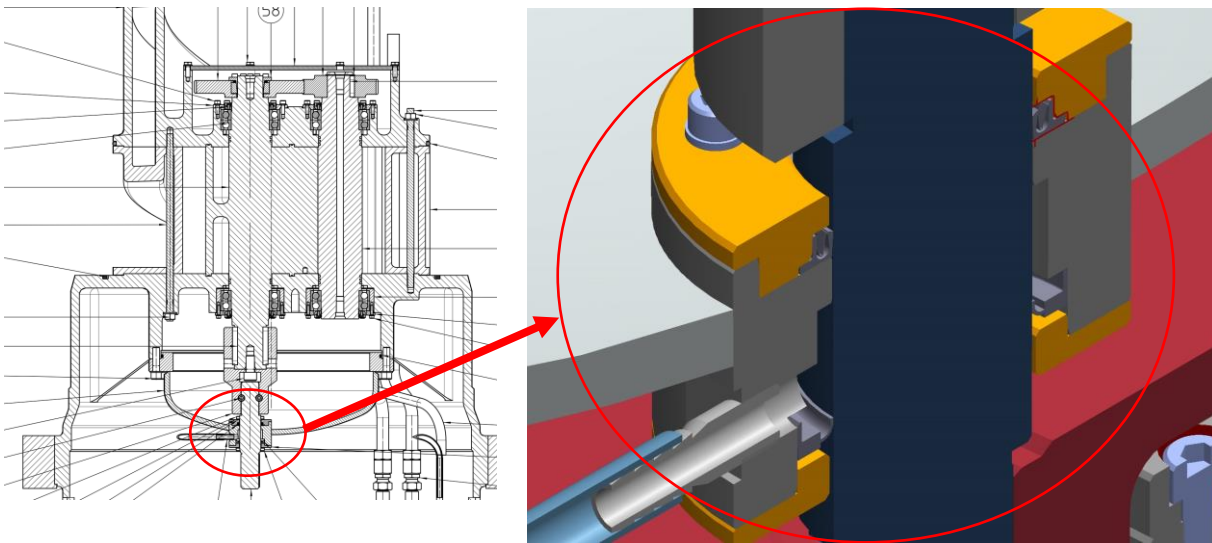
SEAL HOUSE POSITION (LEFT); DETAILED VIEW (RIGHT)
